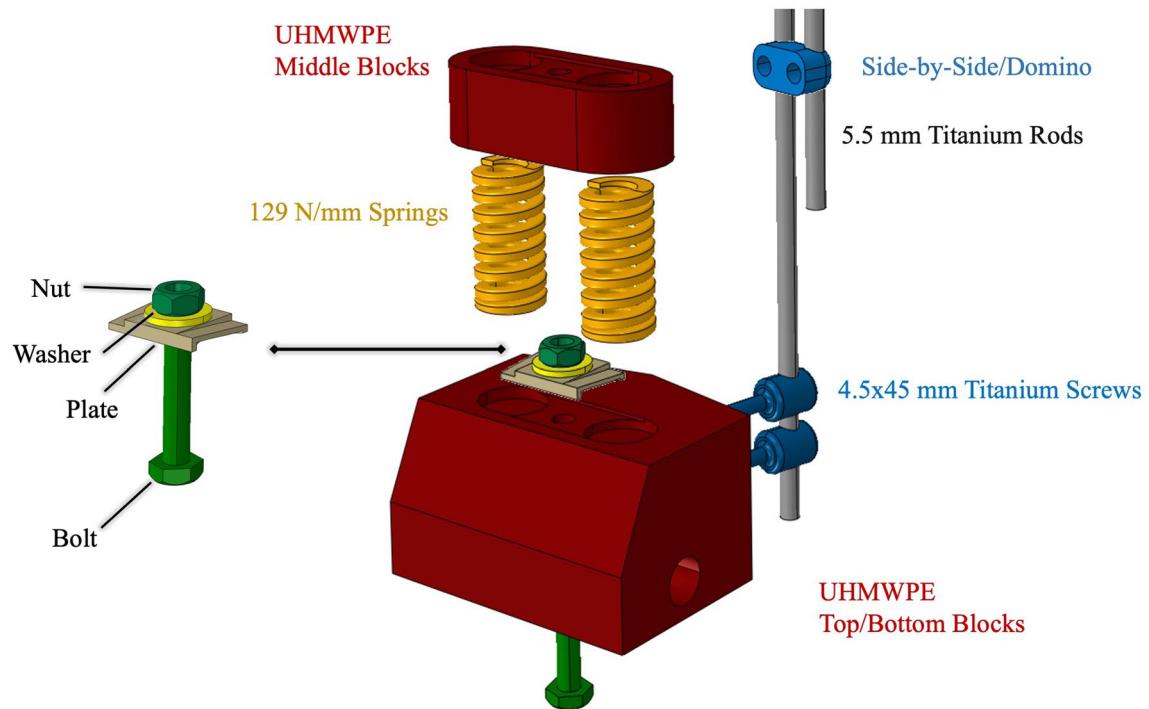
A clamping mechanism was used to attach the die springs to the test blocks in the in vitro testing setup. At each side of the block's, springs were secured rigidly by means of a plate and bolt shown here.
